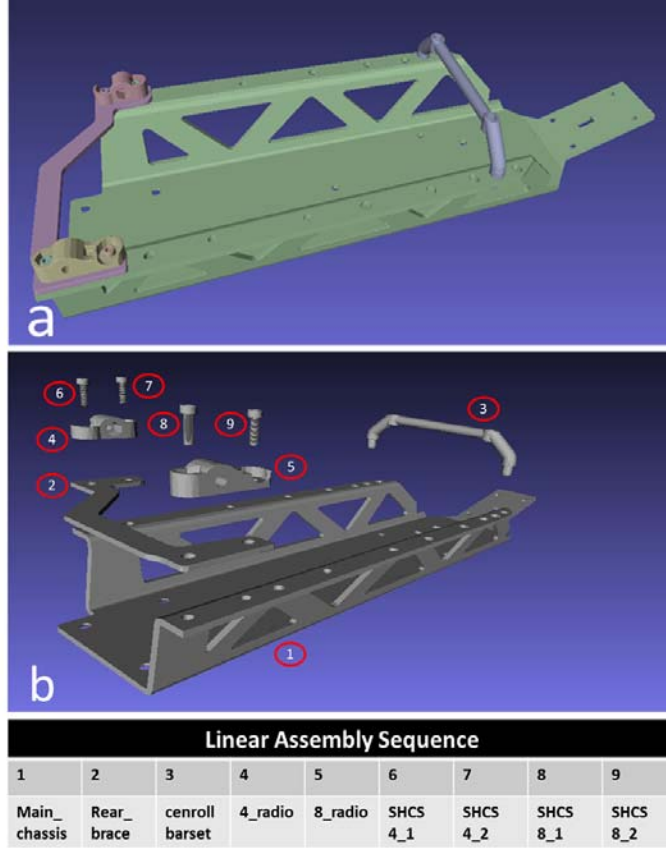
(a) CAD model of the simple chassis assembly used in the experiments. (b) Assembly sequence generated by the assembly planner.
